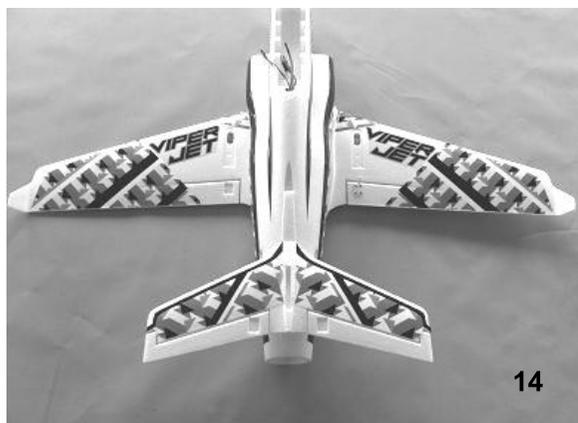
The photo shows the finished view after gluing the horizontal stabilizers in place.
